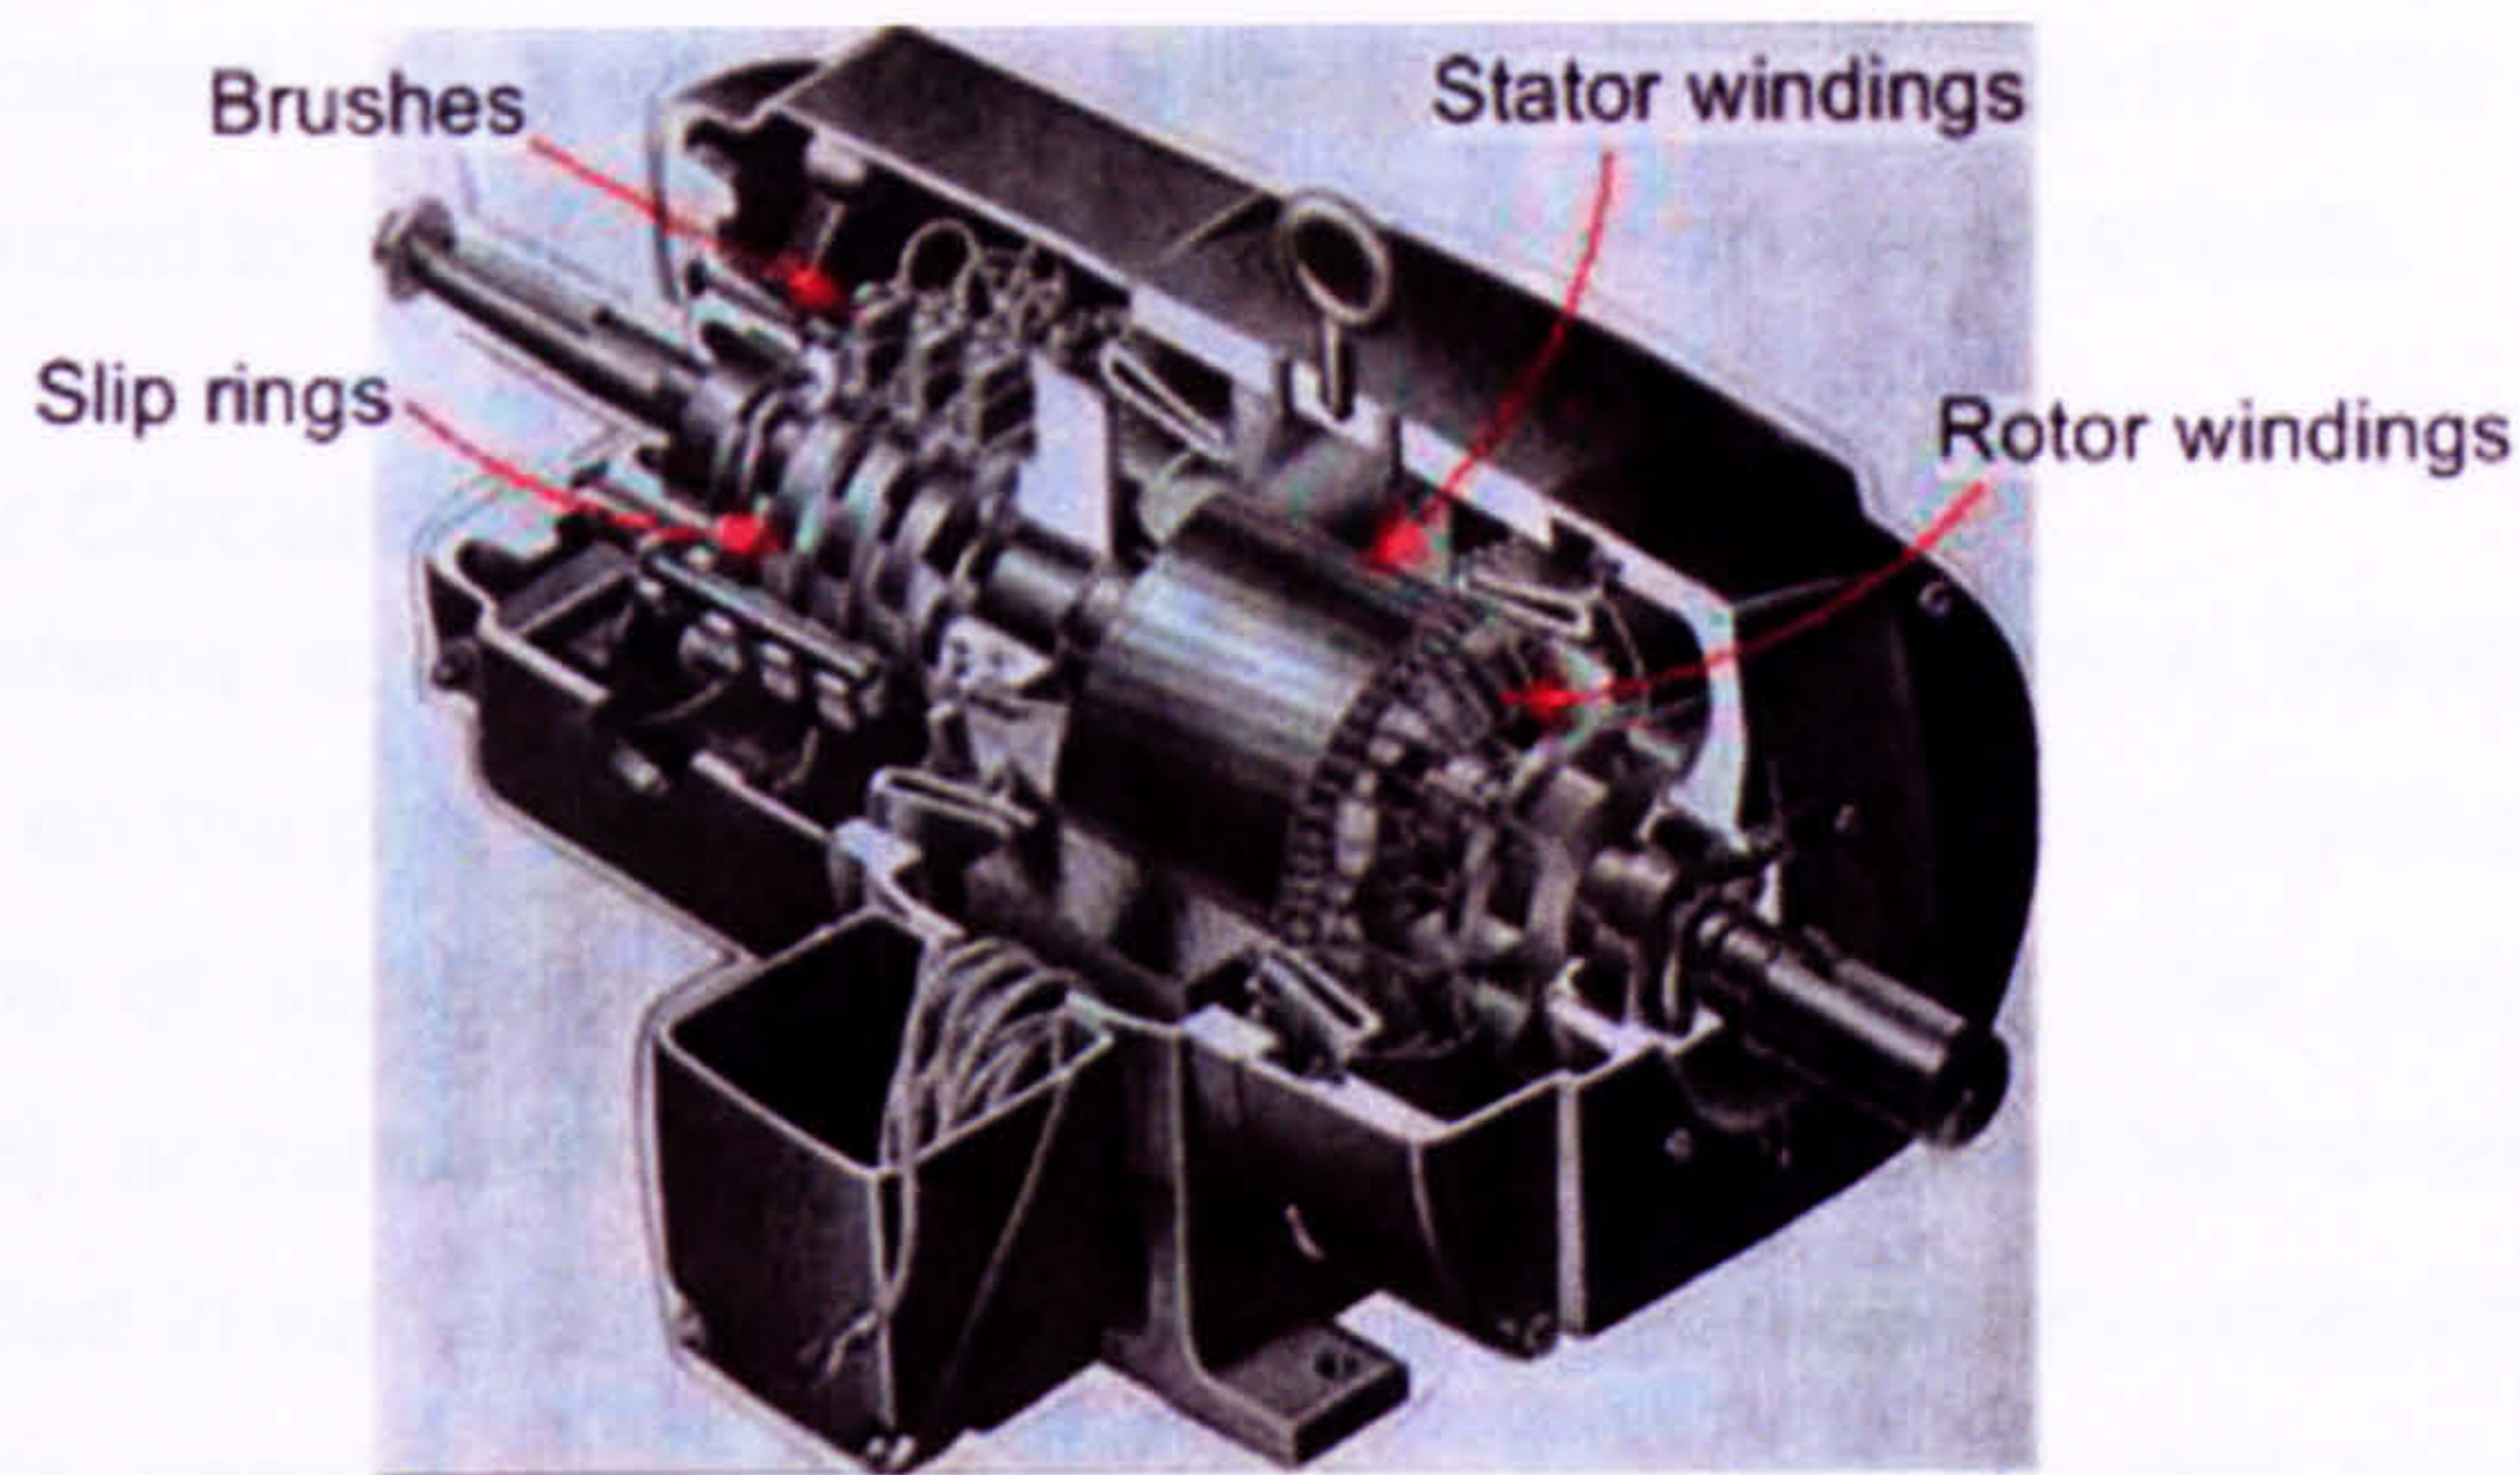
Cutaway section of a wound-rotor induction machine [47].
